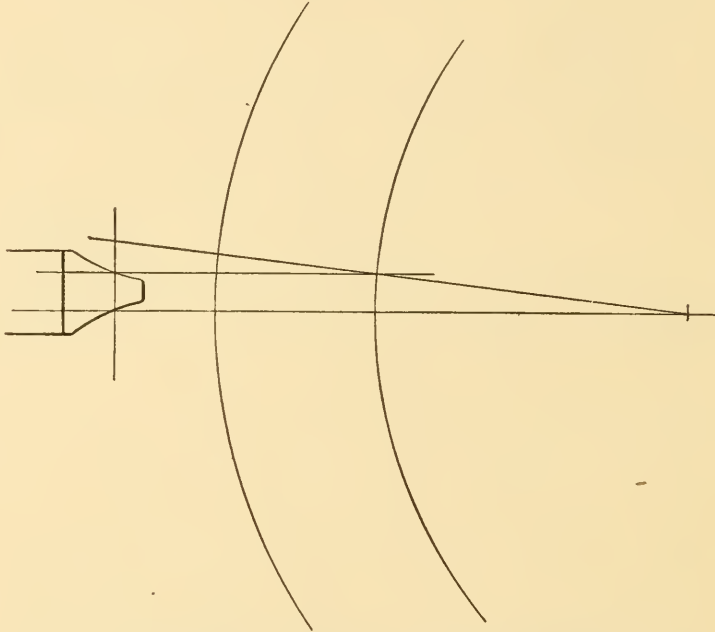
CUTTER IN POSITION FOR SECOND SIDE CUT.
